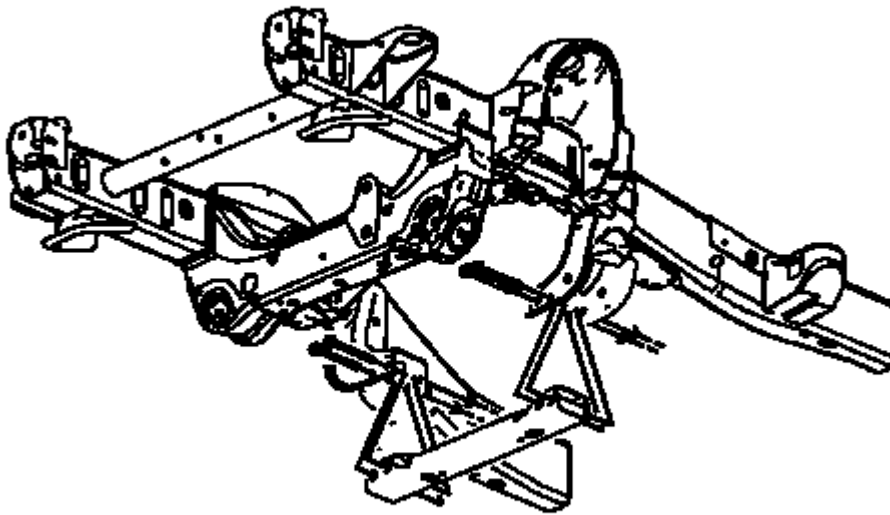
View Of Vehicle Crossbar, Bolts & Nuts
